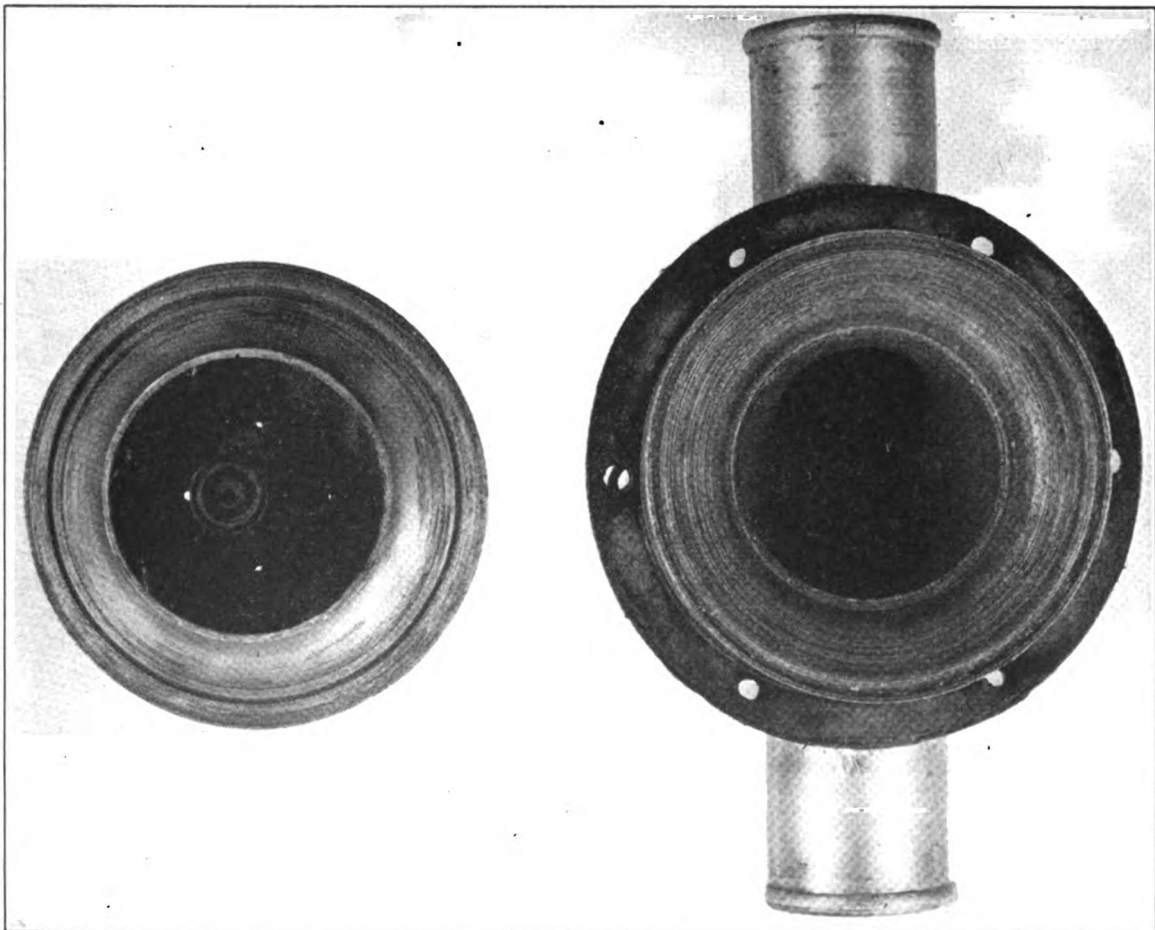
Water pump showing wear on impeller and lower casing. The wear developed during the dynamometer runs, but the pump was used during the torque stand after lignum vitae was substituted for the bronze button on the case.
